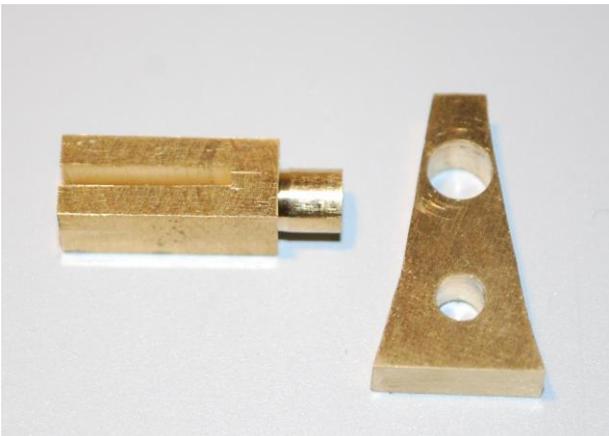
The suspension bracket post and base. The holes for the spring mounting screw have not yet been drilled in the post.
